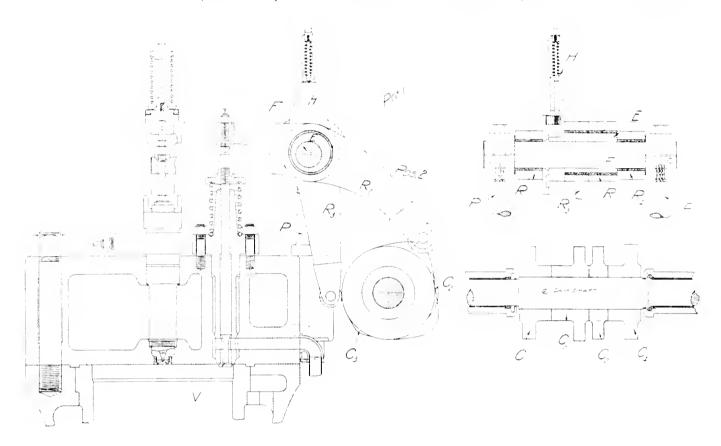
Details of a form of Starting Mechanism commonly used in Diesel Engine Practice
